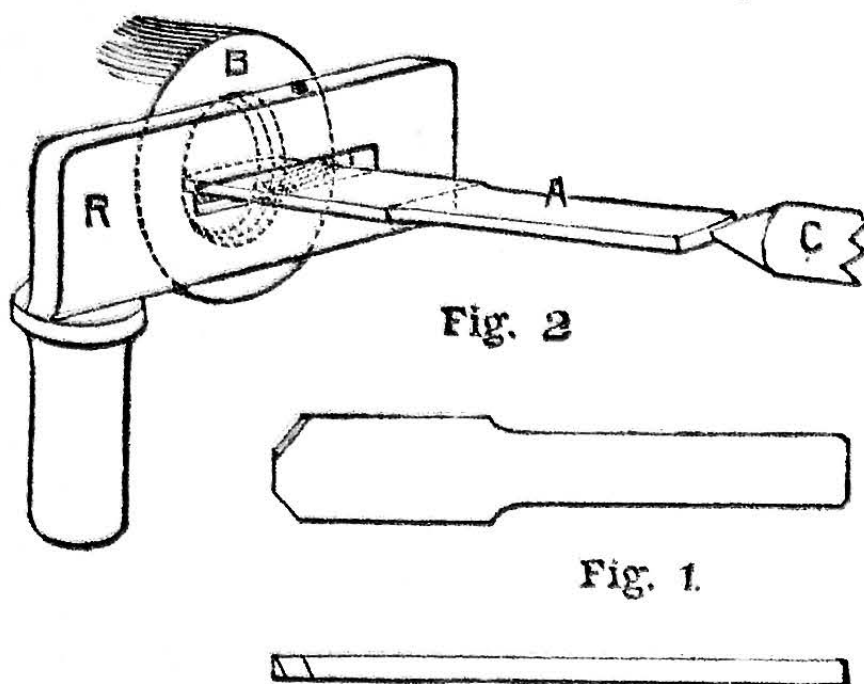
Chucking-Drill. Fig. 2.—Tool in Process of Boring.
